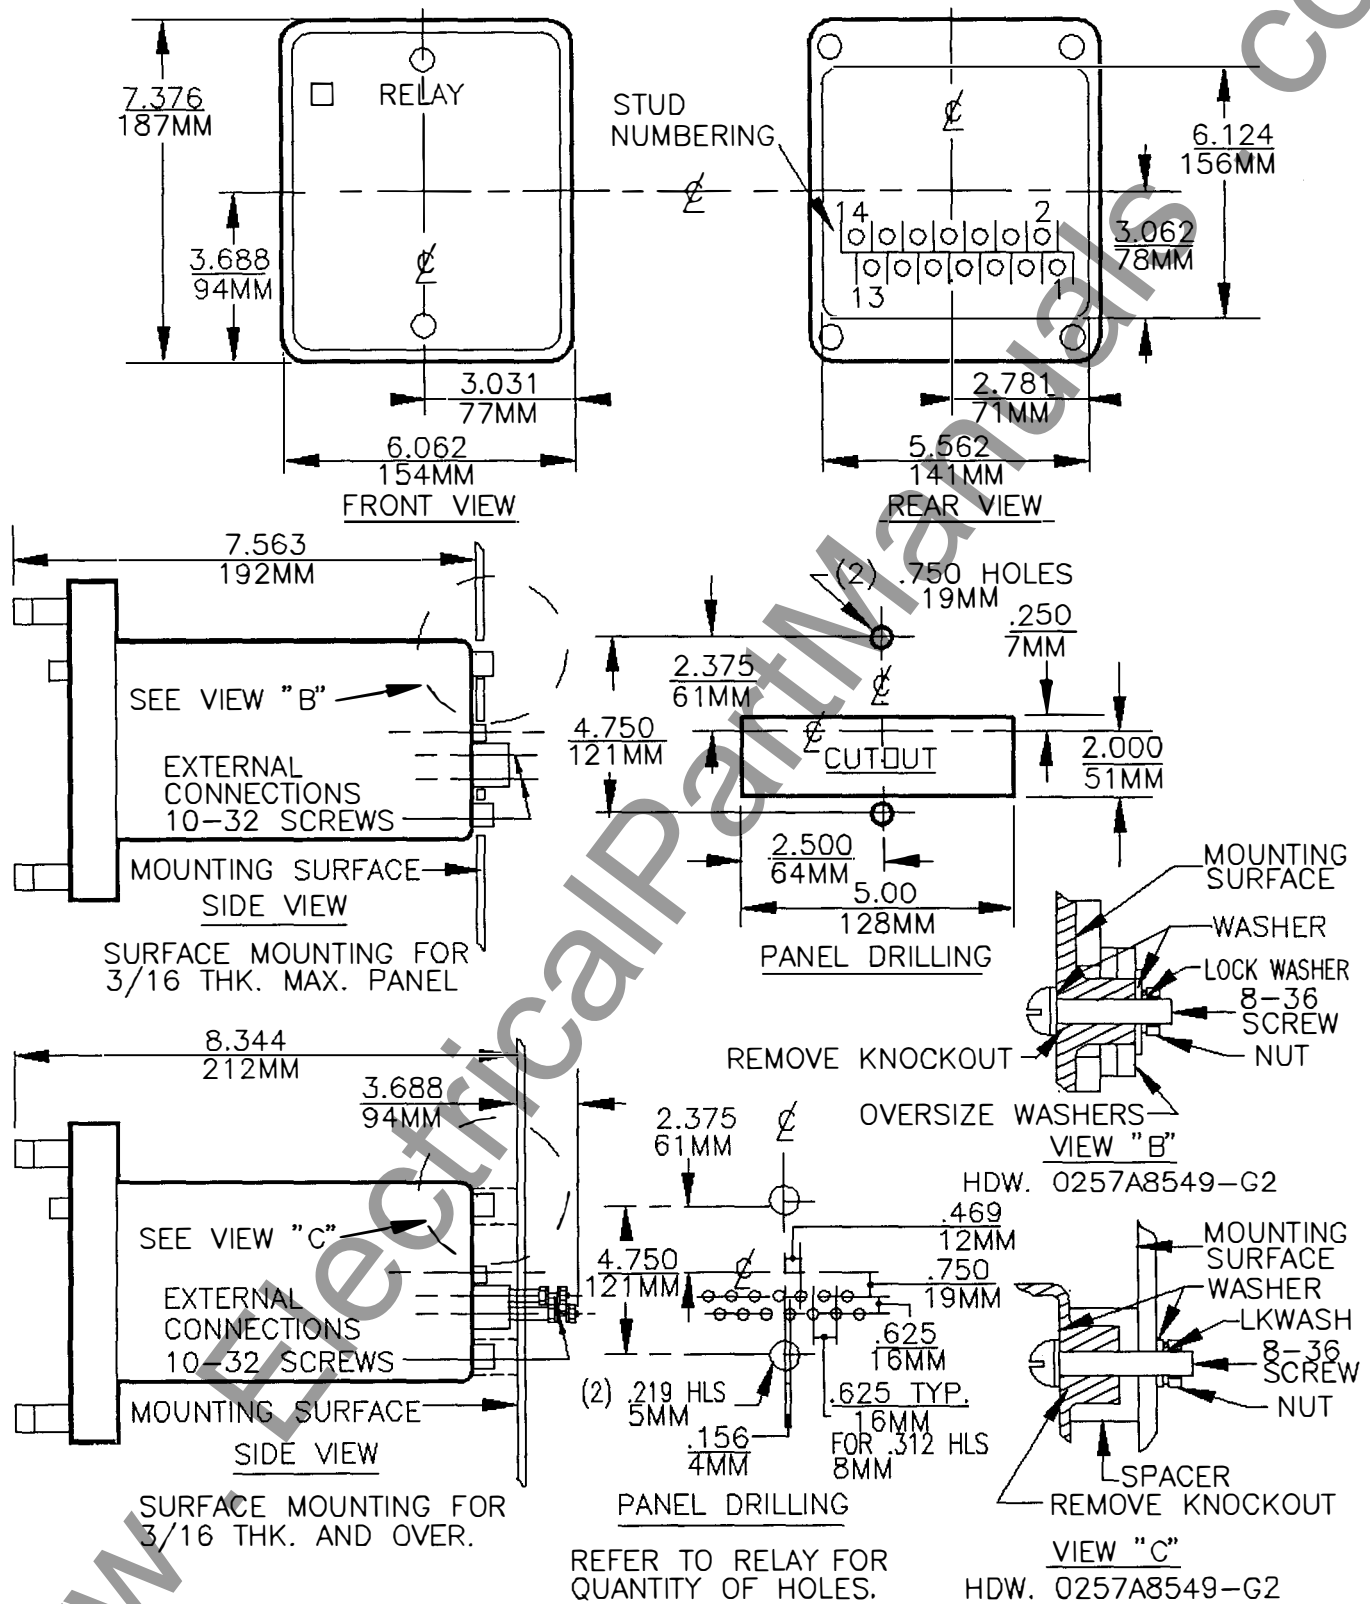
(0257A8452 Sheet 2 [5]) Outline & Panel Drilling for Surface Mounting of Relay Types IFC51, IFC53 and IFC77
